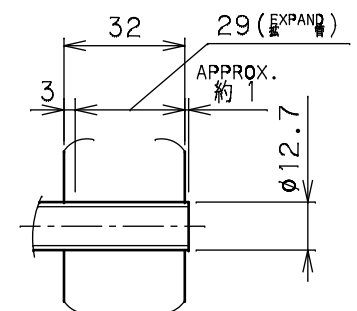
DETAIL OF "TUBE SIDE" NOZZLE (VIEW A-A)
